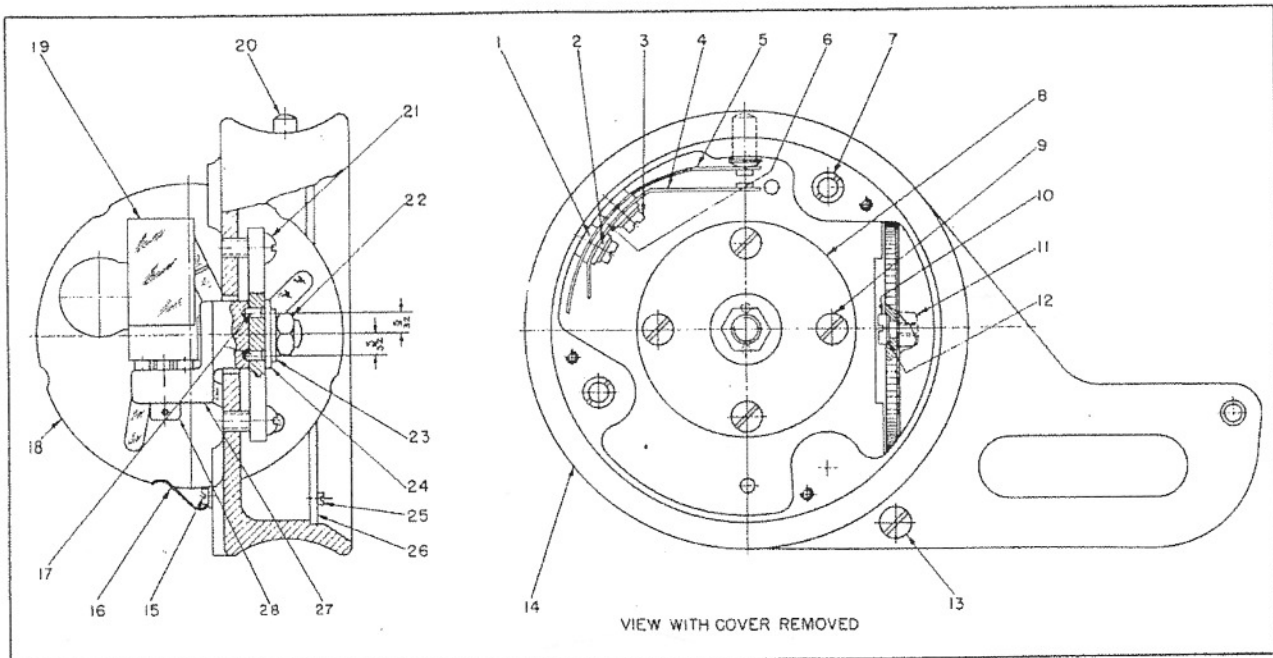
Left Side - Sectional View - Aircraft Sextant - Type A-7 (3003-A, 3003-B)
